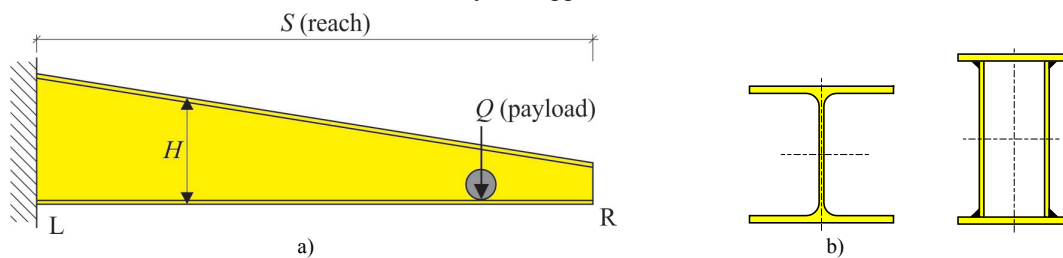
a) Schematic model of jib (cantilever), b) Typically used sections
